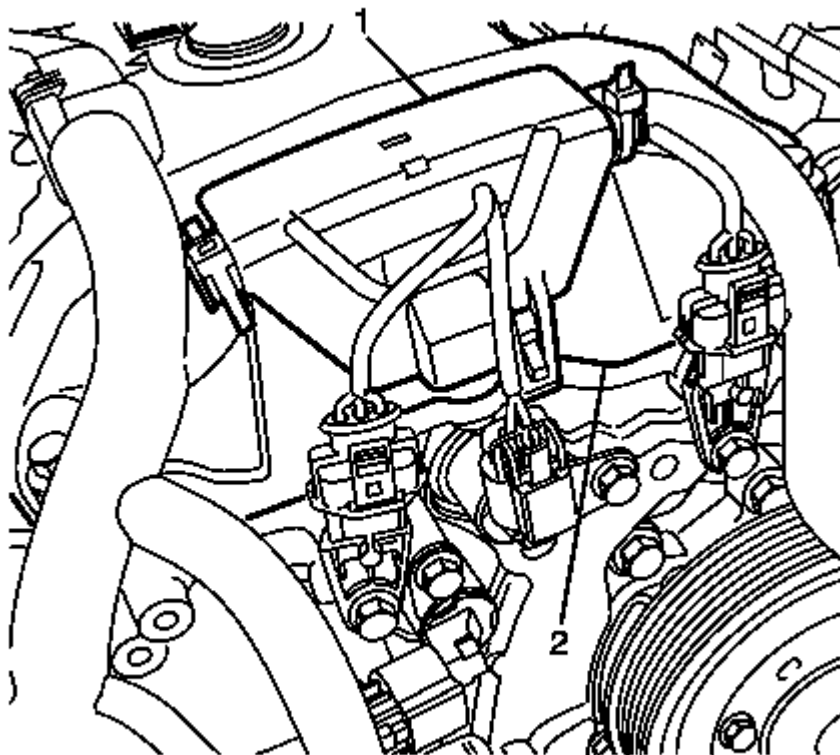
Identifying Wiring Harness & Camshaft Cover
